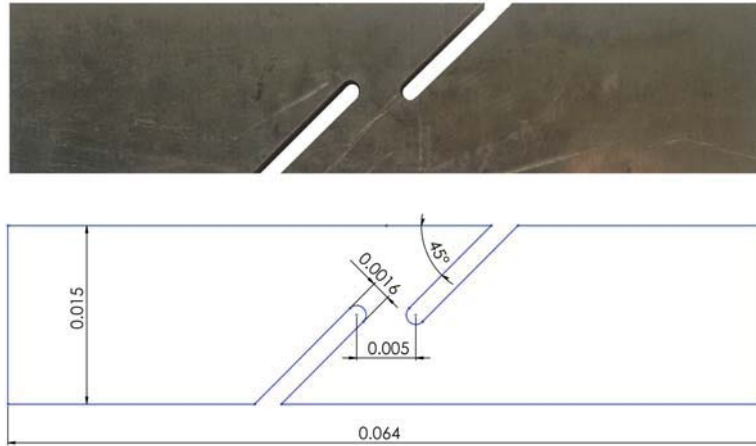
The specimen of shear test (dimensions are in millimeter).
